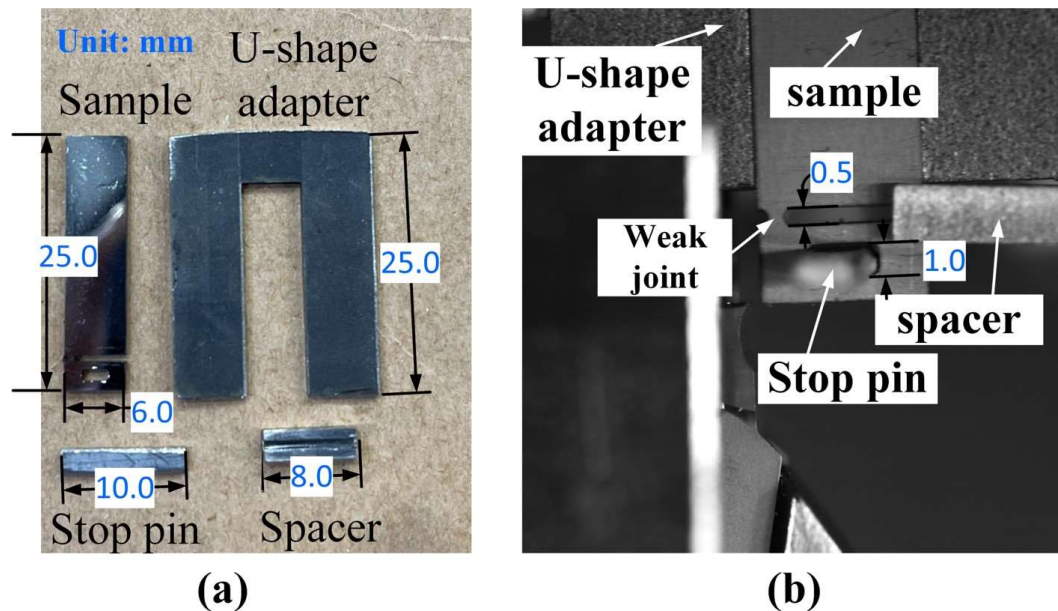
Customised sample for quick-stop cutting test. (a) Test sample composed of four parts: sample, U-shape adapter, stop pin and spacer (Unit: mm); (b) corresponding parts in (a) are assembled for quick-stop cutting test.
